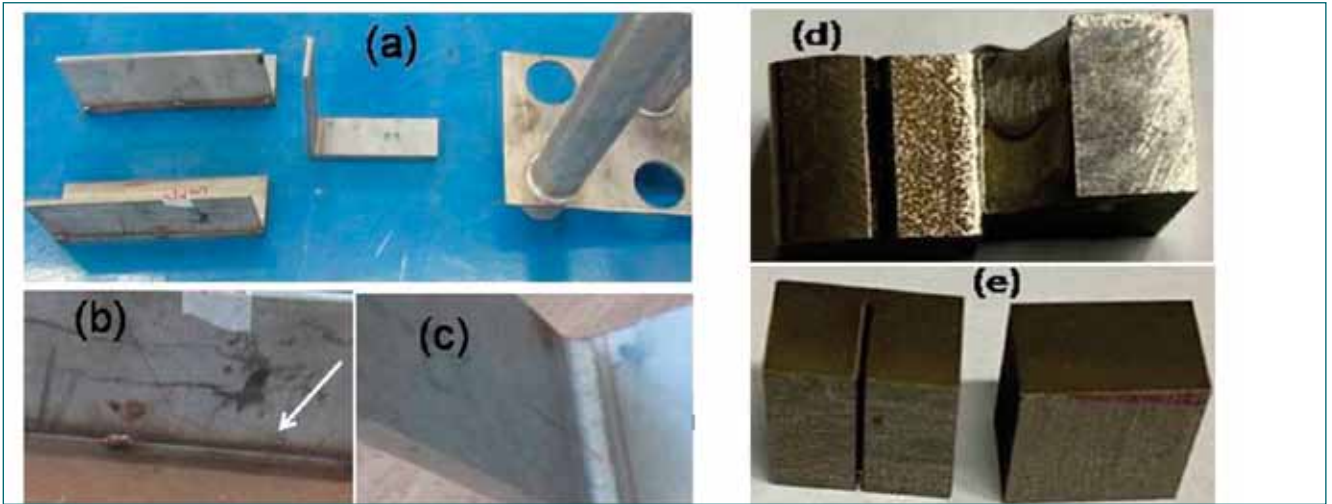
Welded coupons (a) all types, (b) root of fillet with arrow showing incidental gap and (c) face of fillet weld (d) welded and (e) base metal.
